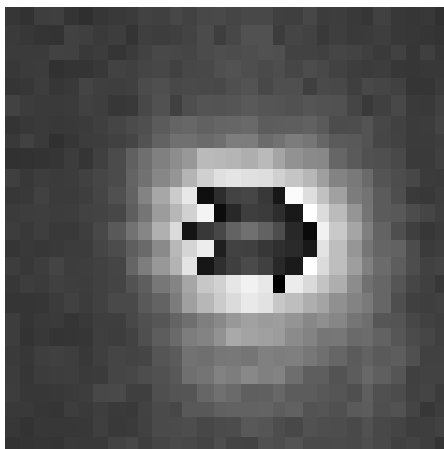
Typical picture of a full penetration weld at IN625, grey scales not calibrated, HPDL, 1 kW
